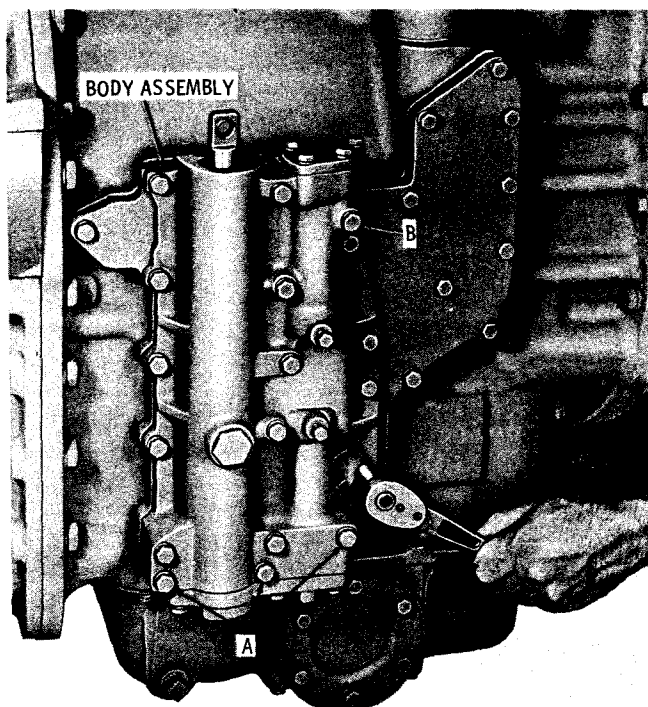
Removing 6-speed control valve body assembly bolts
